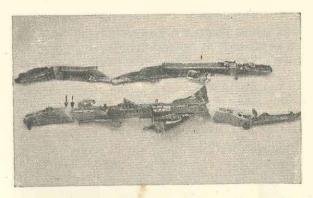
Fractured Portions of Centre Section, Main Spar Boom, assembled in their original relative positions. Port side of assembly is at left, starboard side at right. Arrows indicate fracture surfaces illustrated in Figures 2 and 3.
